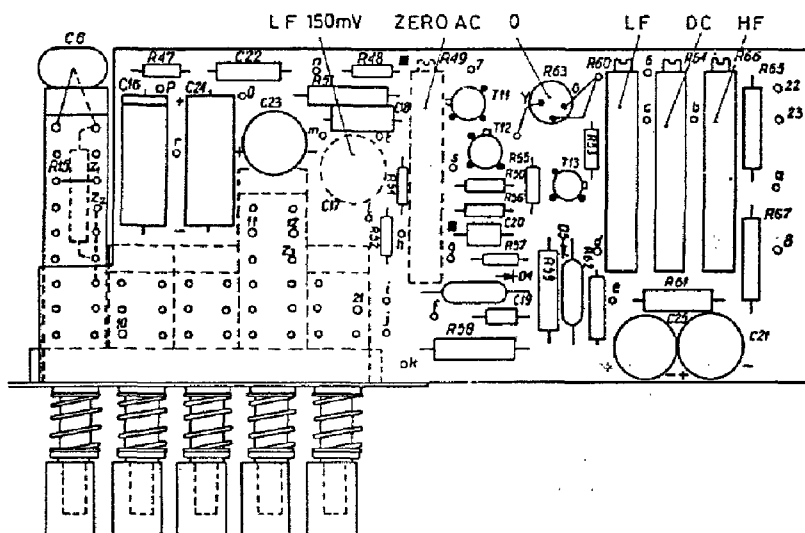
Converter P.C.B. (B-31-1504A) Layout
